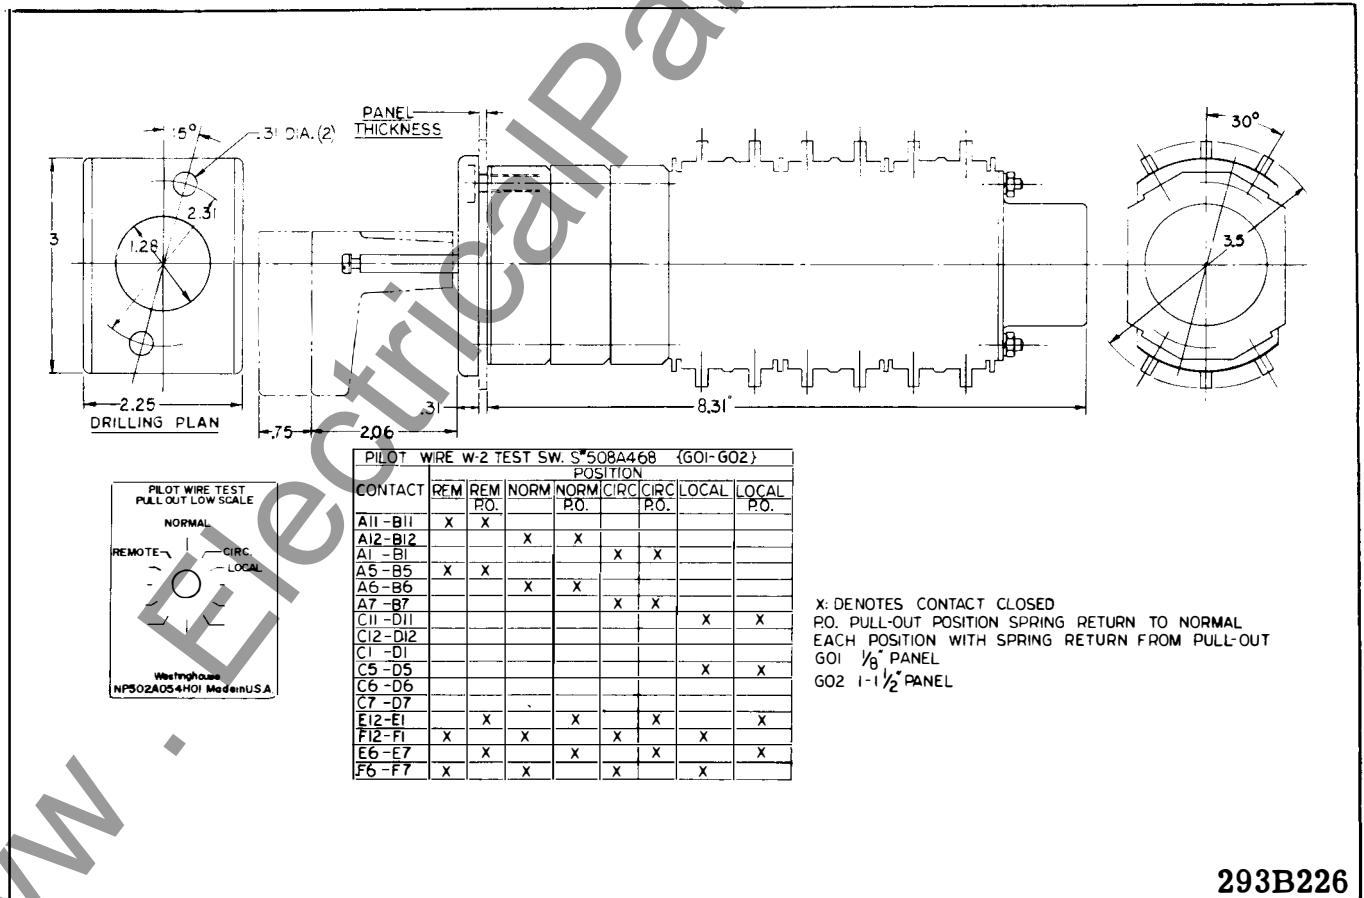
Outline and Drilling Plan of the Type W-2 Test Switch.
